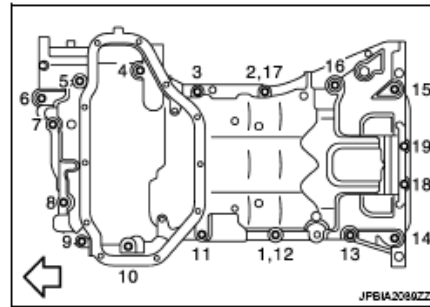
Identifying Oil Pan Mounting Bolt Tightening Sequence
